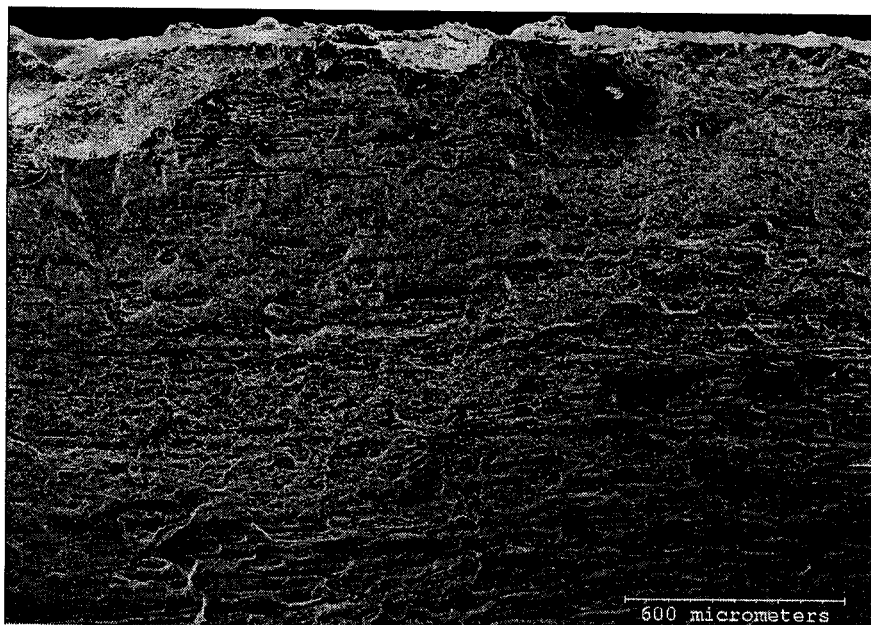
Fracture Surface of Test Specimen T30-3
